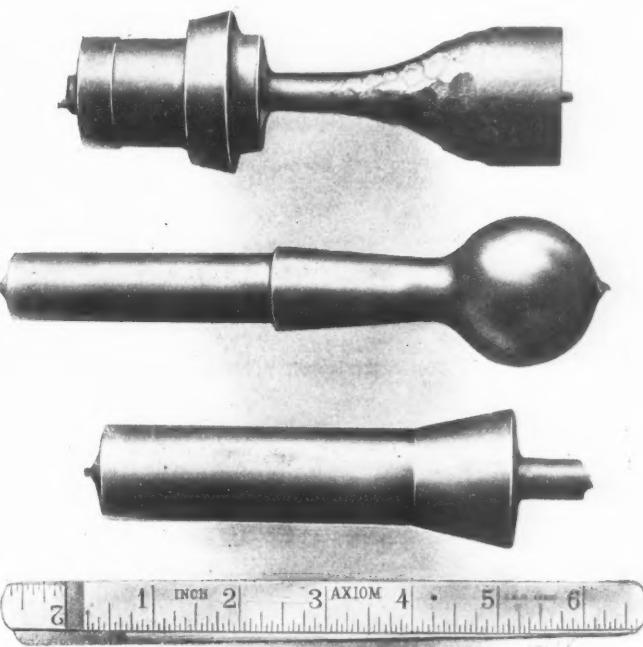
Examples of Work formerly done on a 200-pound Hammer, but with Concrete Foundations completed on a 100-pound Hammer.
